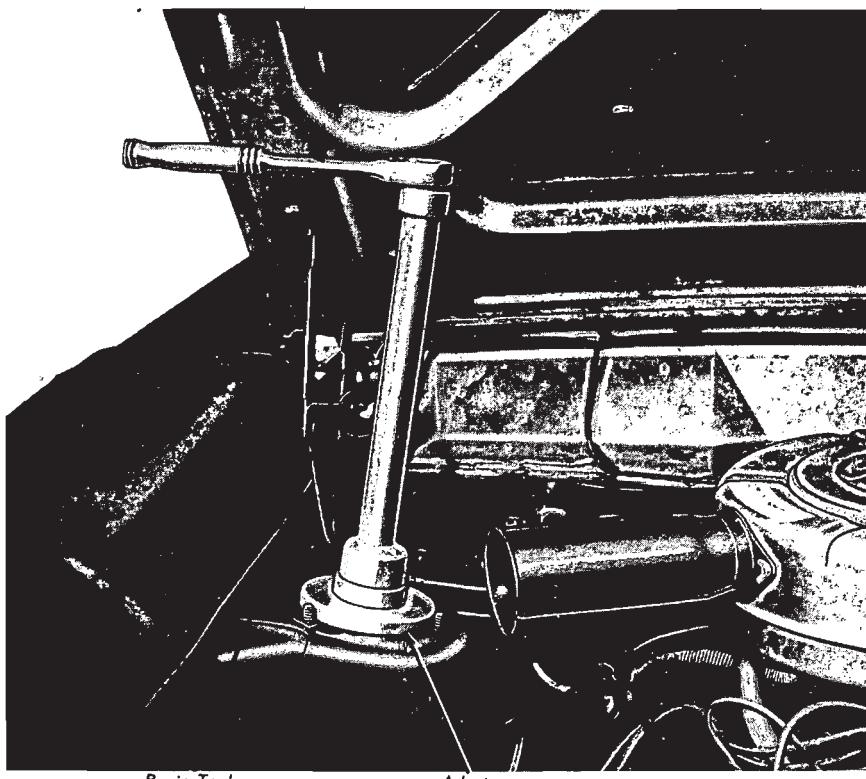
Spring Compressor Tool Installed—Upper View—Typical
